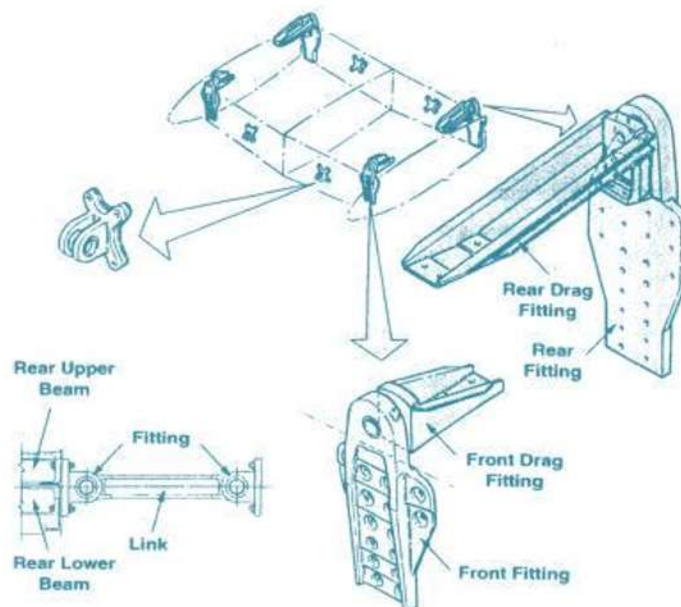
Example of Centre Wing Box Attachment (Saab 2000)
